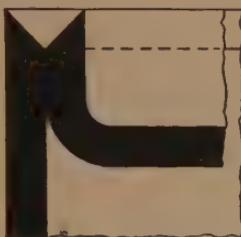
Head Weld for Medium-Pressure Tanks
